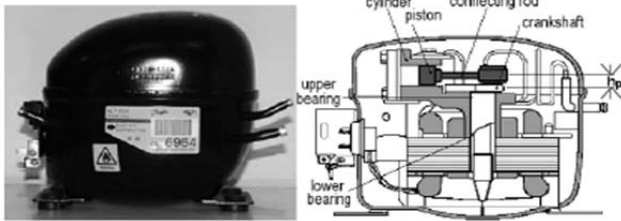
Picture and schematic draw of a hermetic reciprocating compressor.
